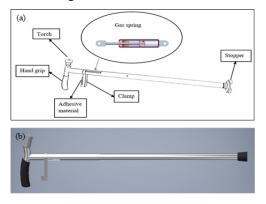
Preliminary design of prototype - Design C, (a) sketching, (b) 3D model drawing.
